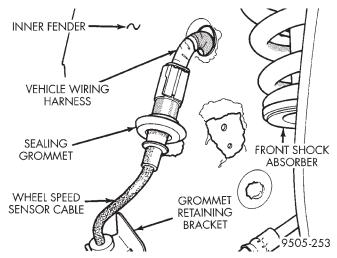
Wheel Speed Sensor Connection To Vehicle Wiring Harness
